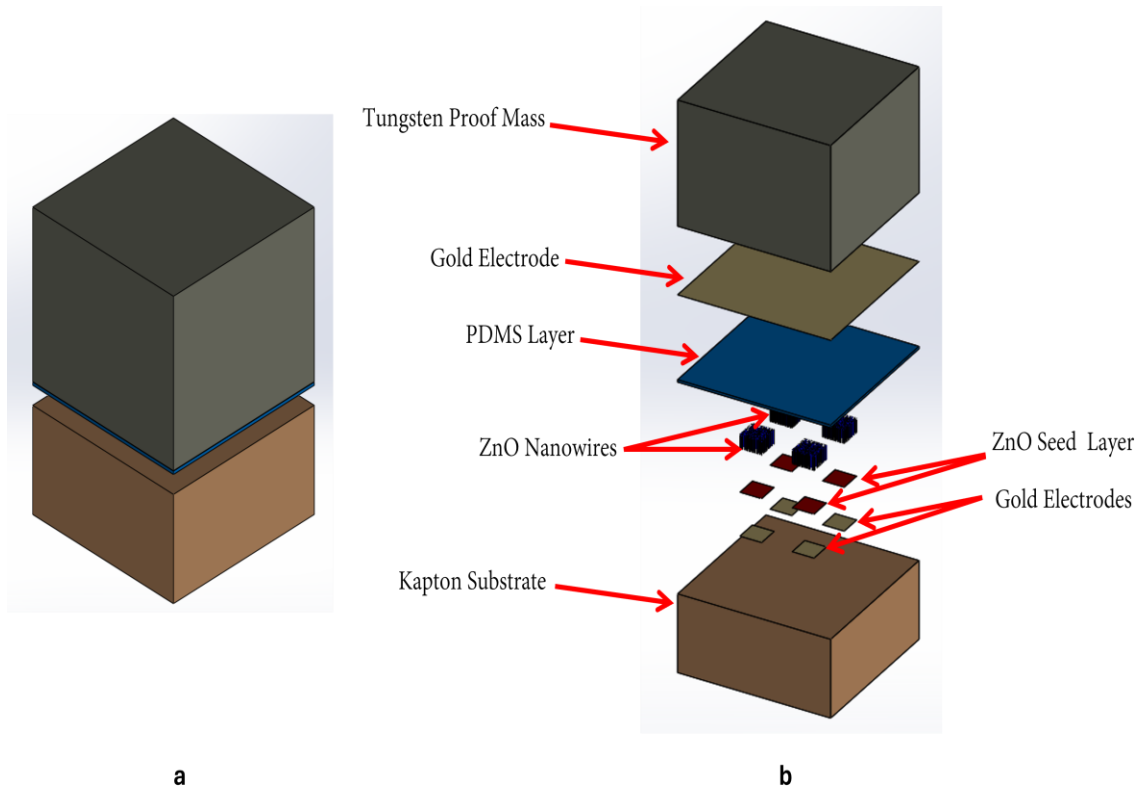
Design of Proposed Accelerometer (a) 3d View (b) Exploded View
